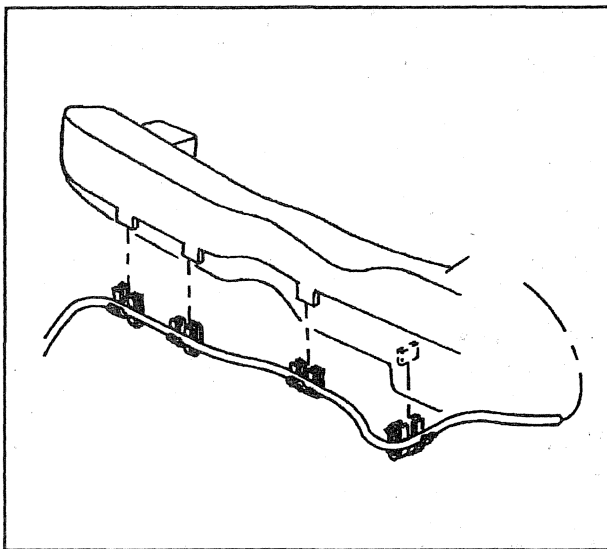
Antenna Extension Cable Routing to HVAC Duct
